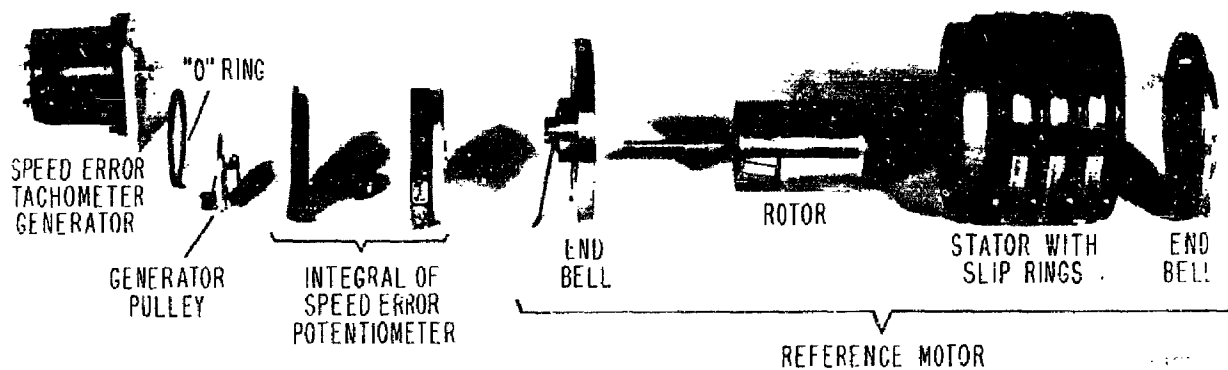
Reference motor and error-conversion elements (exploded view)
